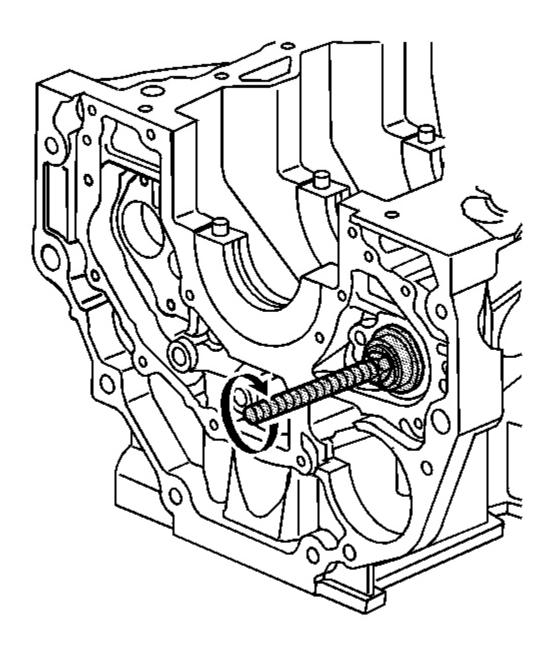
Installing J 4425 Into Left Balance Shaft Bearing Bore Courtesy of GENERAL MOTORS CORP.
